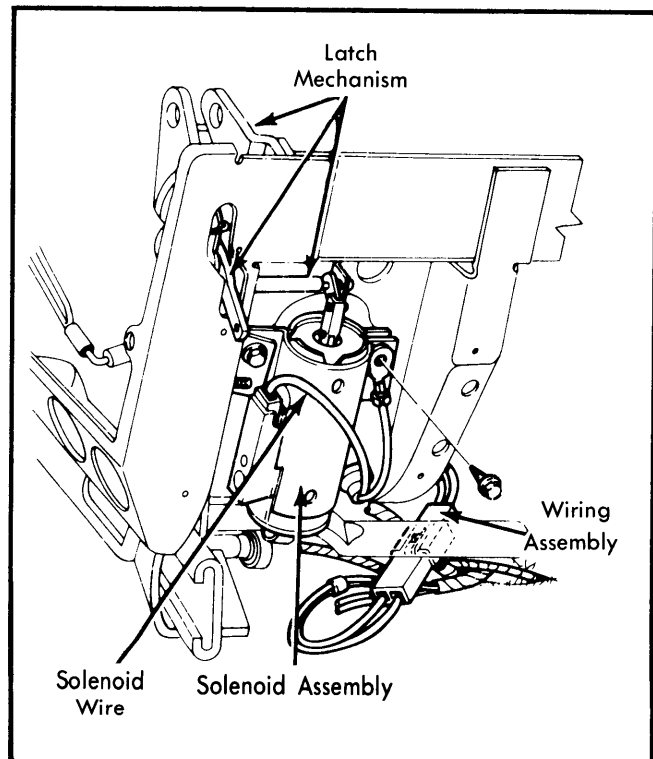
Ford Motor Co. Seat Back Latch Assembly (Thunderbird, Cougar, LTD II & Mark V Shown – All Others Similar)
